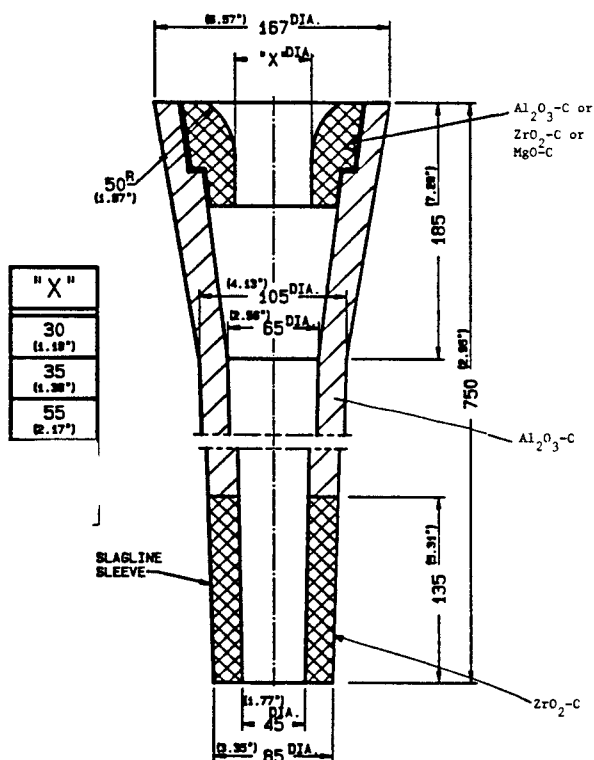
Typical tundish-to-mold shroud with various nozzles.
